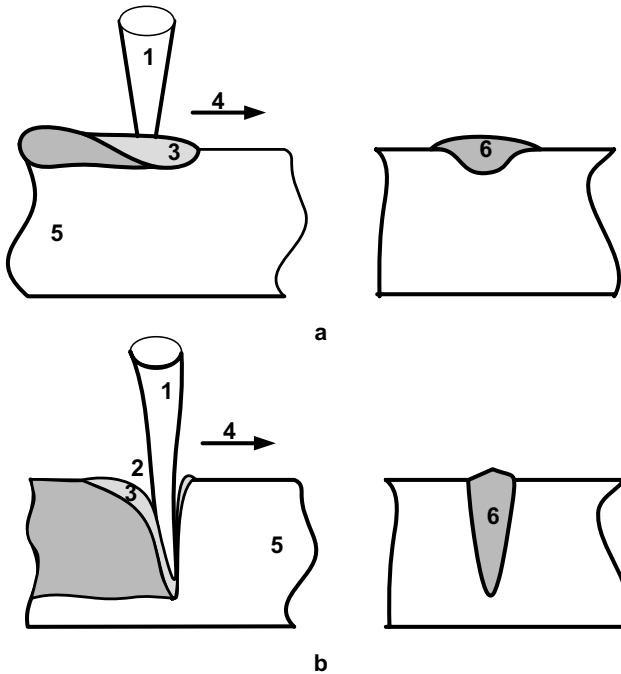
Laser welding modes: Heat conduction-mode – a; deep-penetration mode – b. Laser beam – 1; vapor channel – 2; weld pool – 3; welding direction – 4; work-piece – 5; solid melt – 6.
